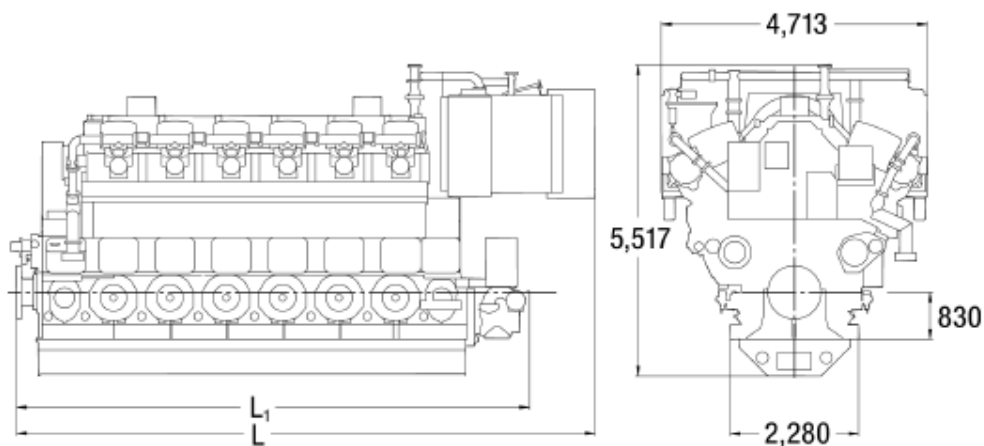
Main dimensions and weights – Engine V51/60DF
